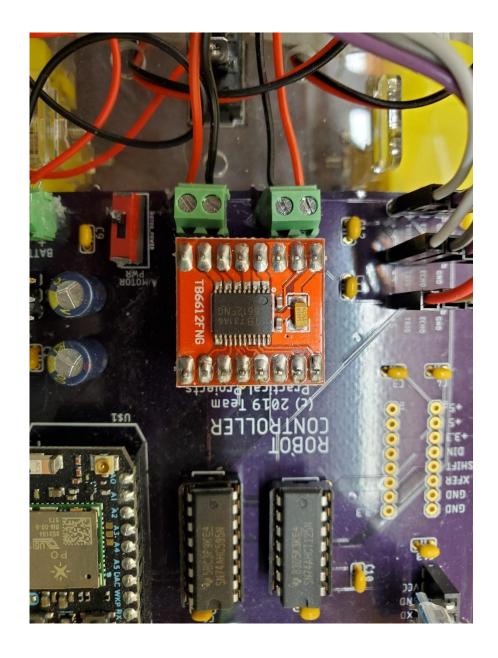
Positioning the Motor Controller and Socketed ICs.
